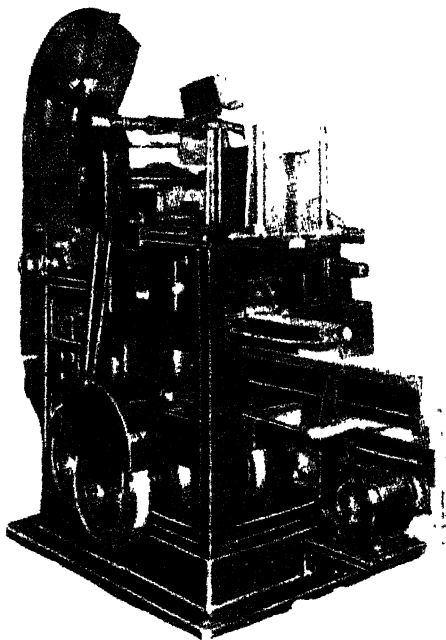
NEW STYLE "SMYTH" CASING-IN MACHINE.
